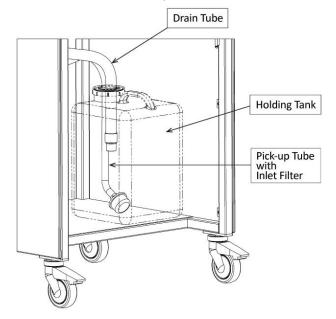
Holding Tank, Drain Tube and Pick-up Tube with Inlet Filter
